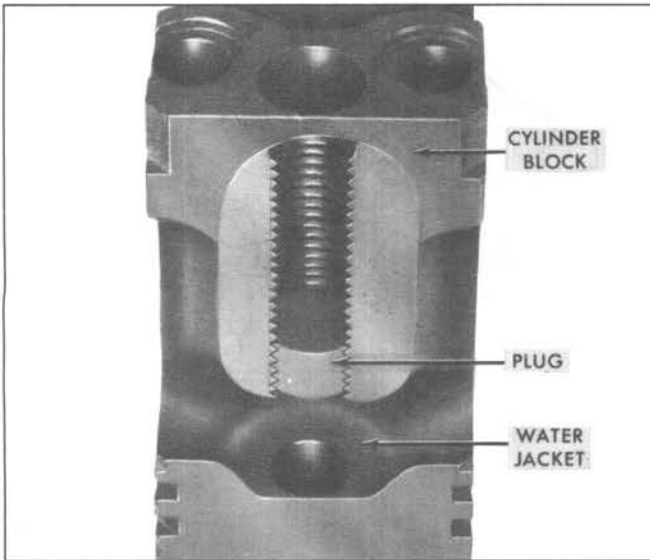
Location of Cylinder Head Bolt Hole Plug
